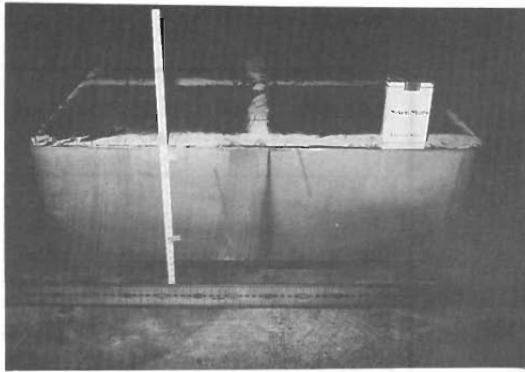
Cut samples of stainless steel heavy plate ($t = 170\text{mm}$)
